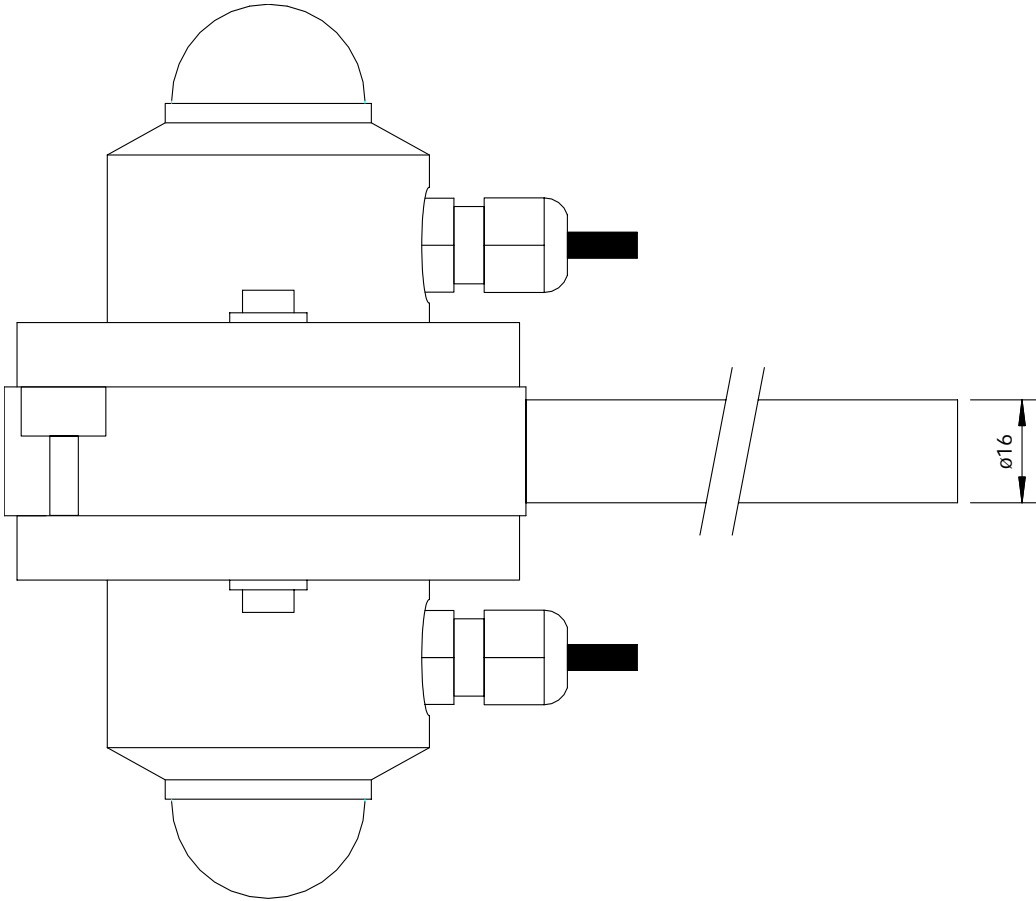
Dimensions including albedometer fixture AMF01
